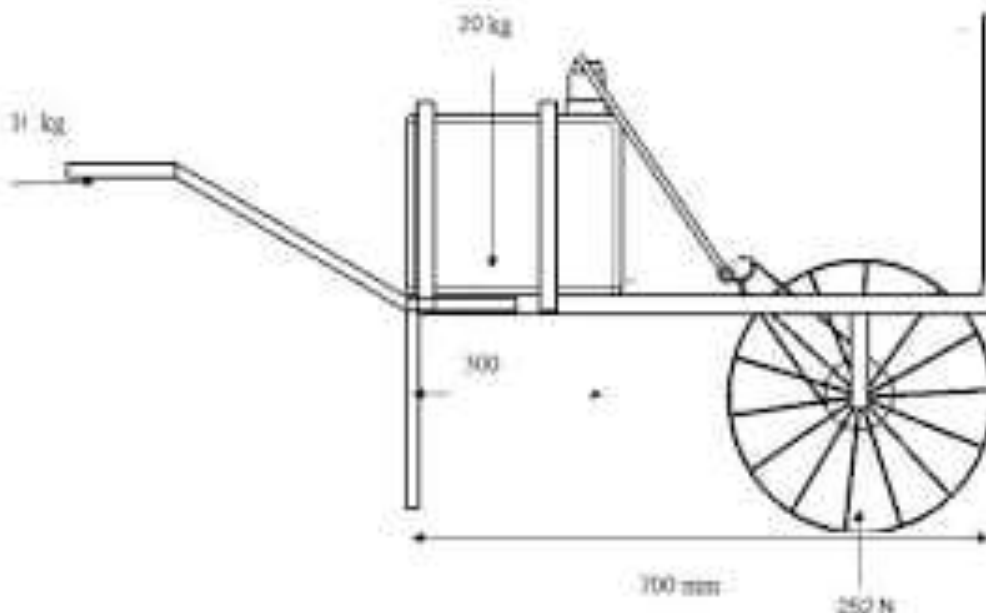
chemical sprayer having front wheel has its driver with sprocket and kinematic links
